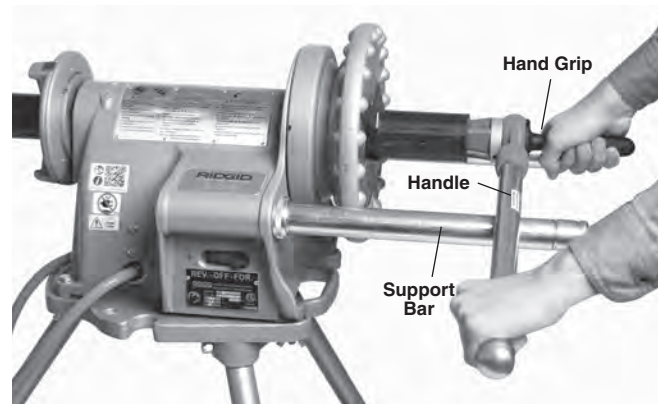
Reaming Pipe with Hand Reamer, (Keep reamer handle in contact with support bar)
